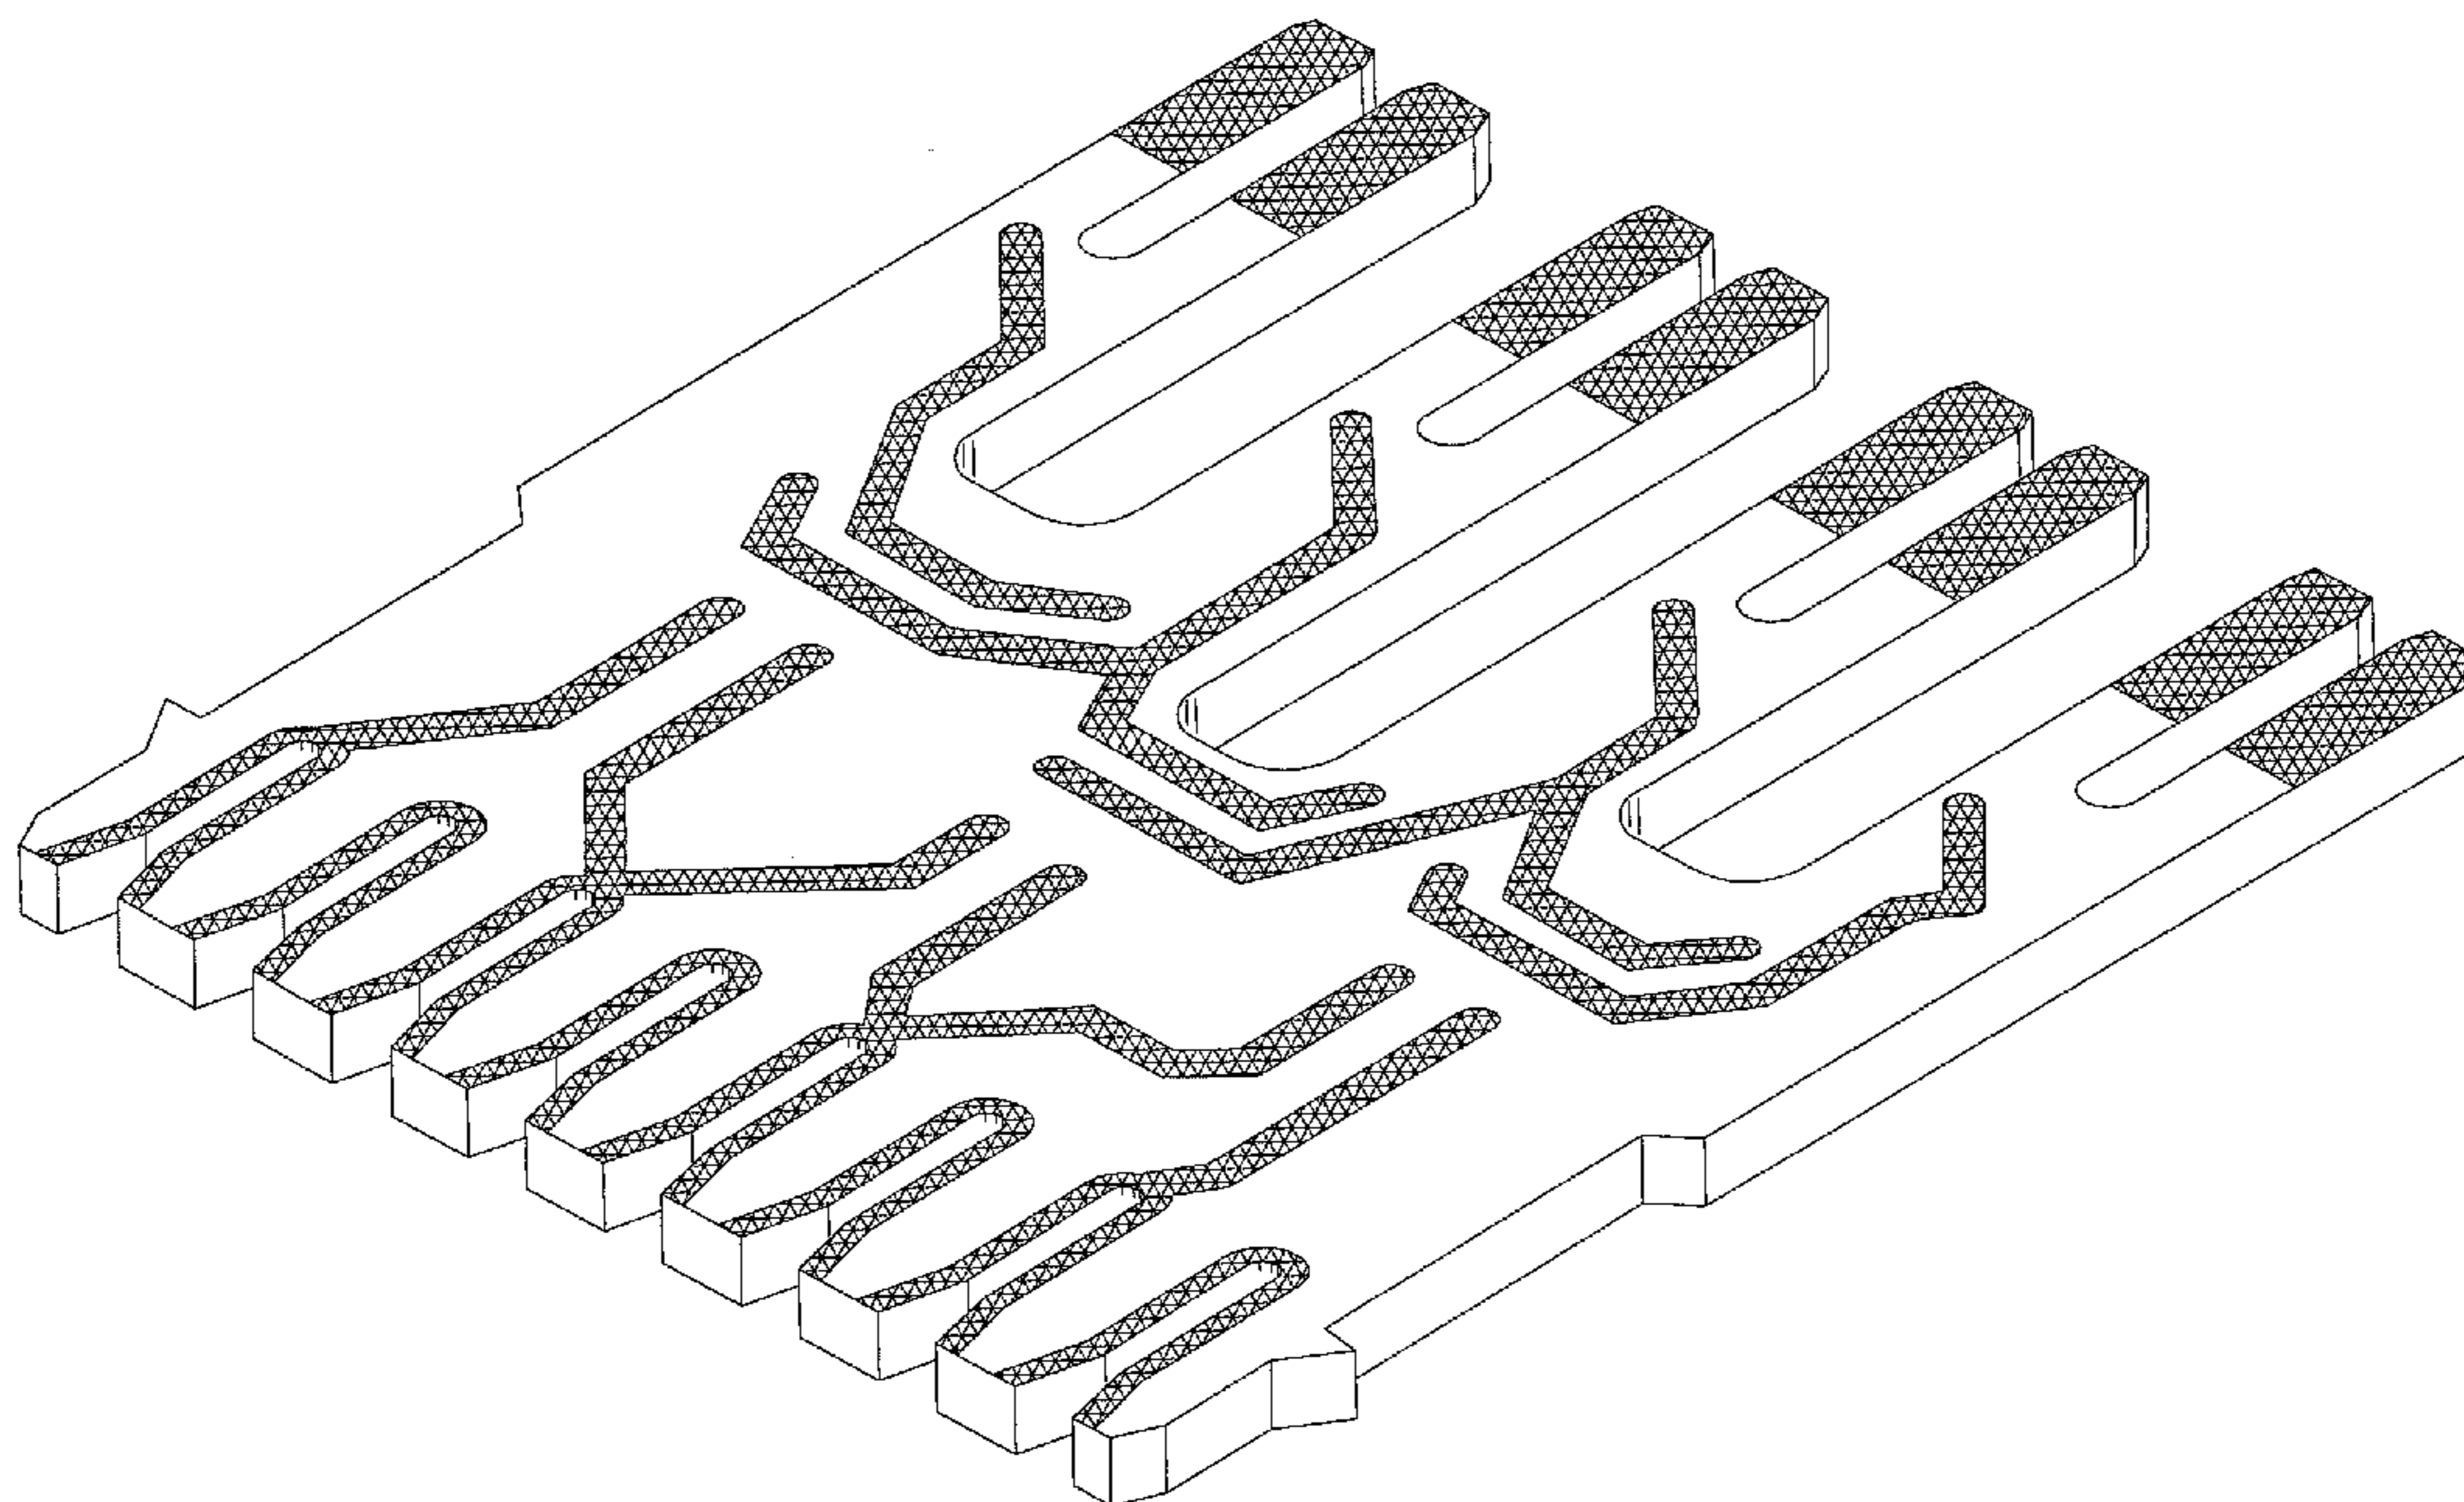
is a view of one face of the printed circuit board for electrical connector;
